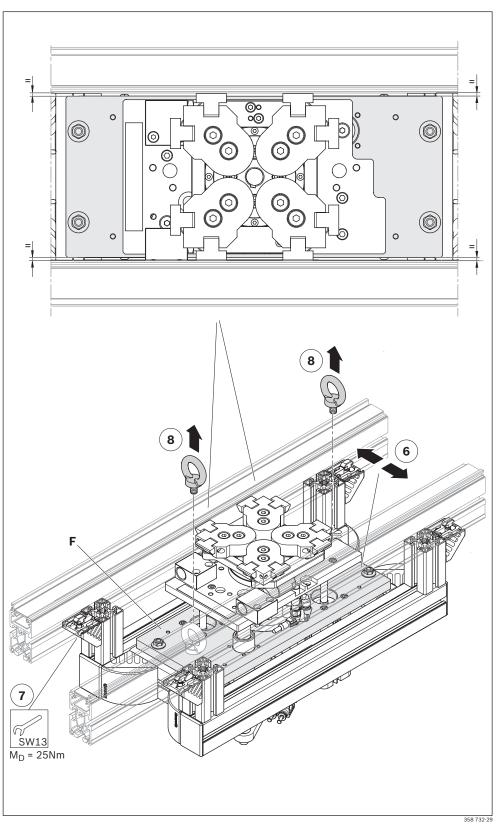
Adjusting the lift rotary unit HD 2/H size 1 in section ST 2 (here size 1 180°)
